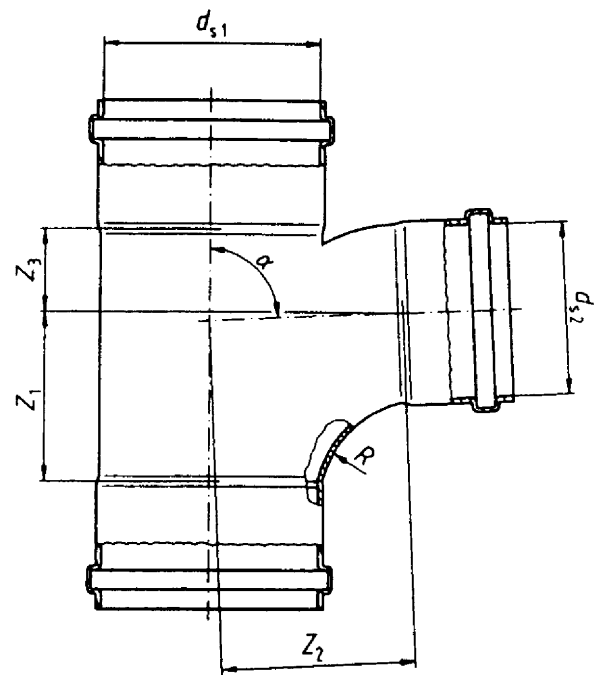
REDUCING BRANCH WITH ALL SOCKETS
